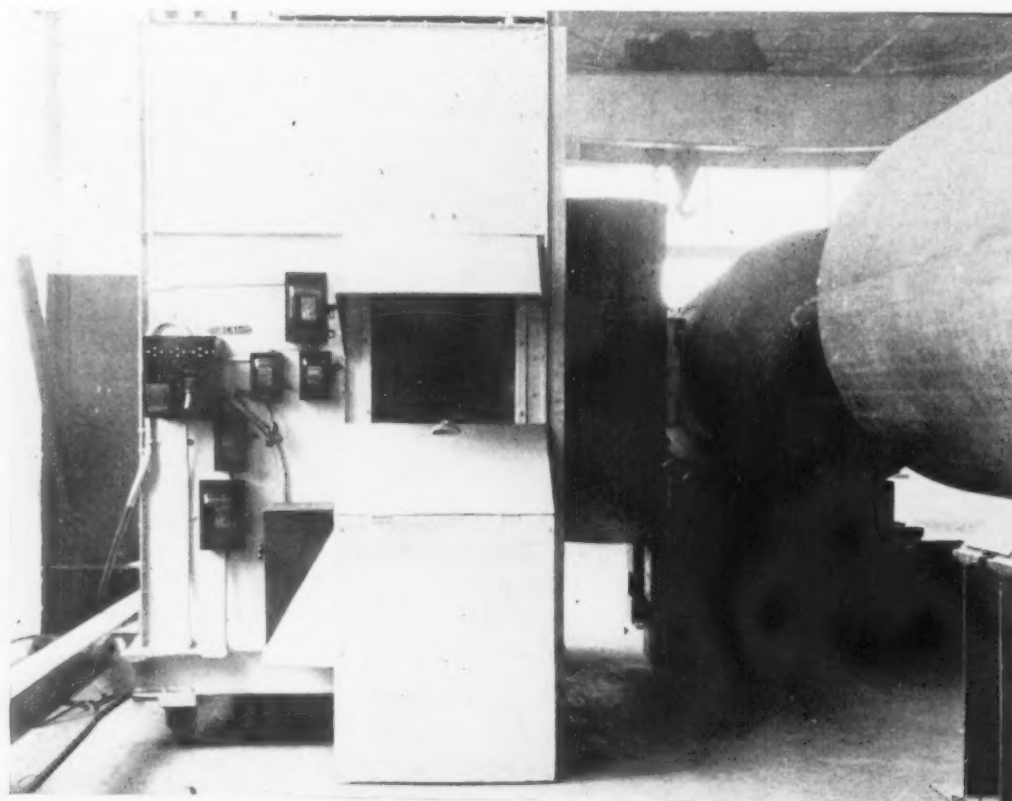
For lighter tanks roller supports are used for circumferential examination to facilitate rotation of the tank. In this case a weld joining a standard dished head on a drum is being X-rayed.
